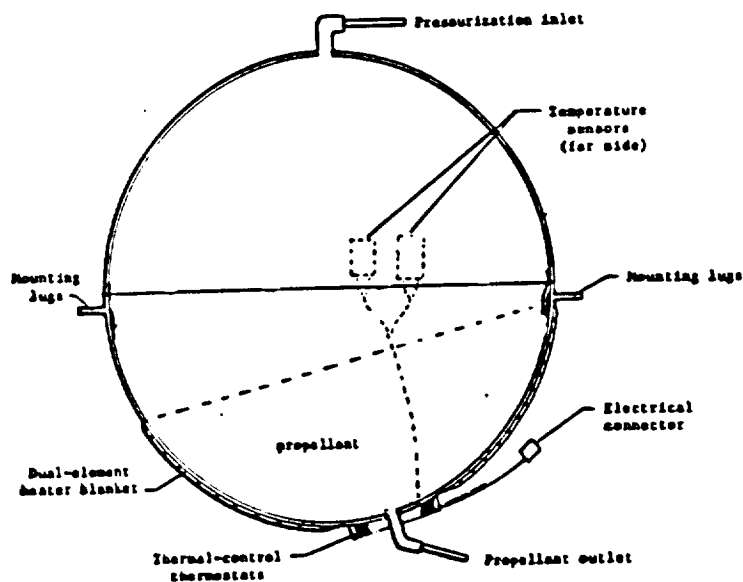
Tank with Heating Insulating Blanket
